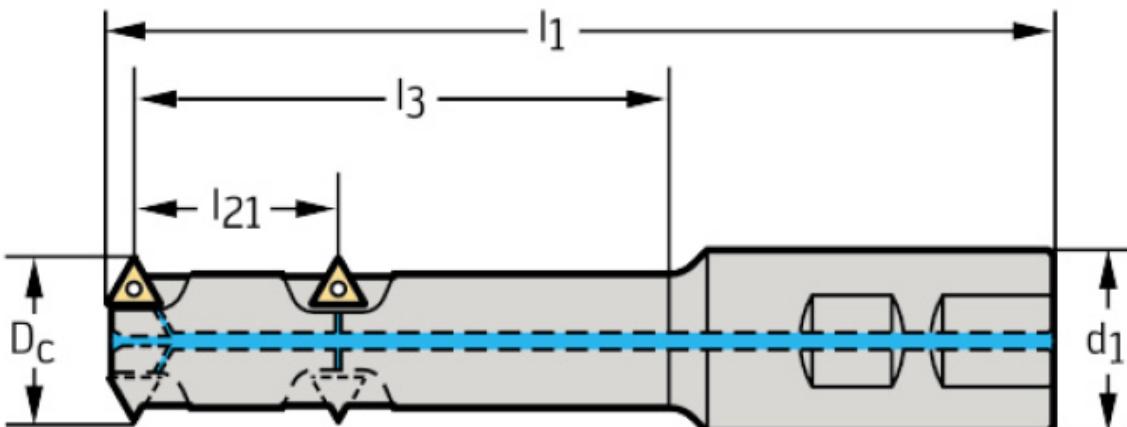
Parameters of Walter Tools thread milling tool with cutting inserts [79].
